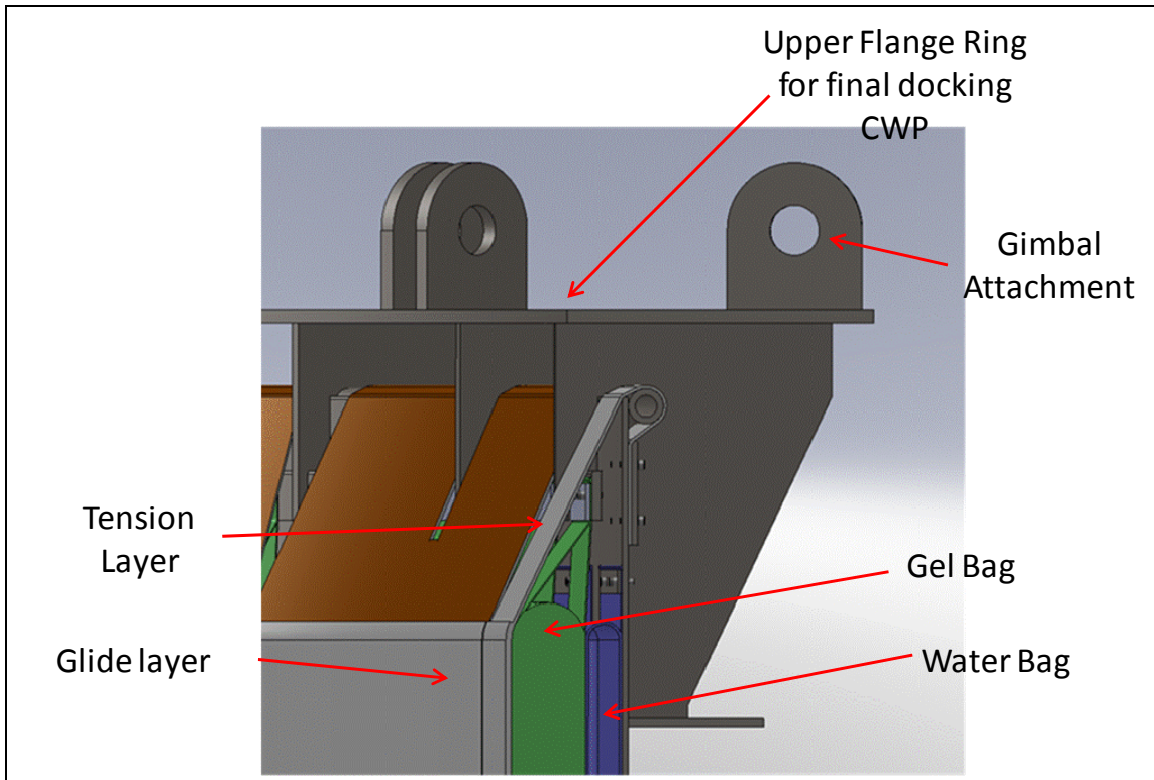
Lower Guide Details of Bag Attachments and CWP Flange
